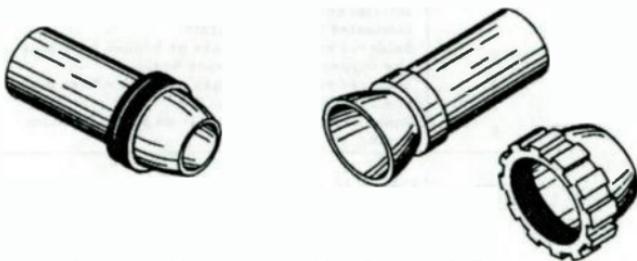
Disassembled Spherical-Type Connector for Flexible Shielding Conduit
